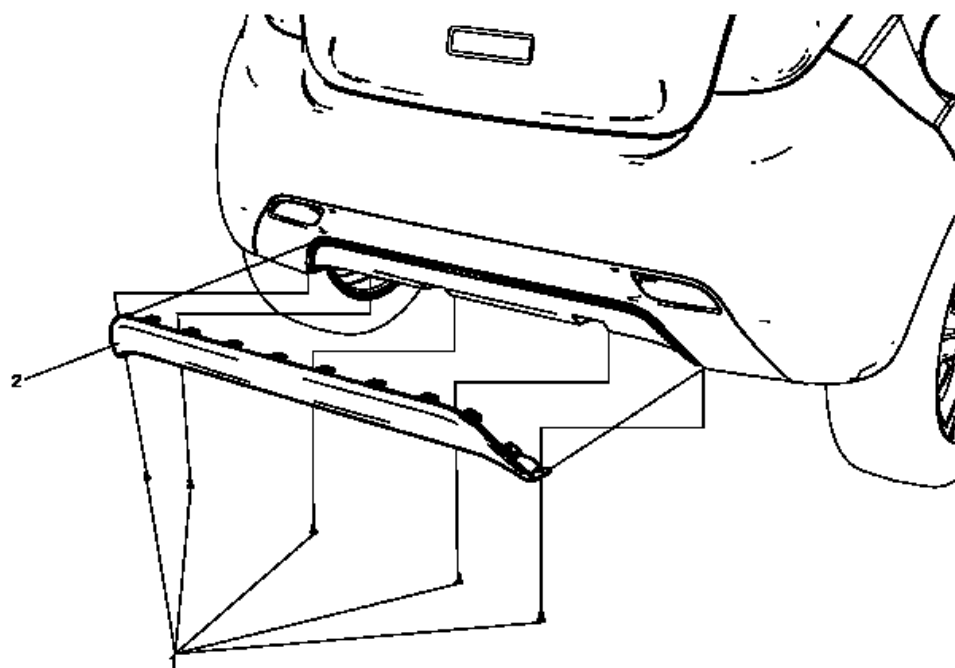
Rear Bumper Fascia Lower Skid Plate
